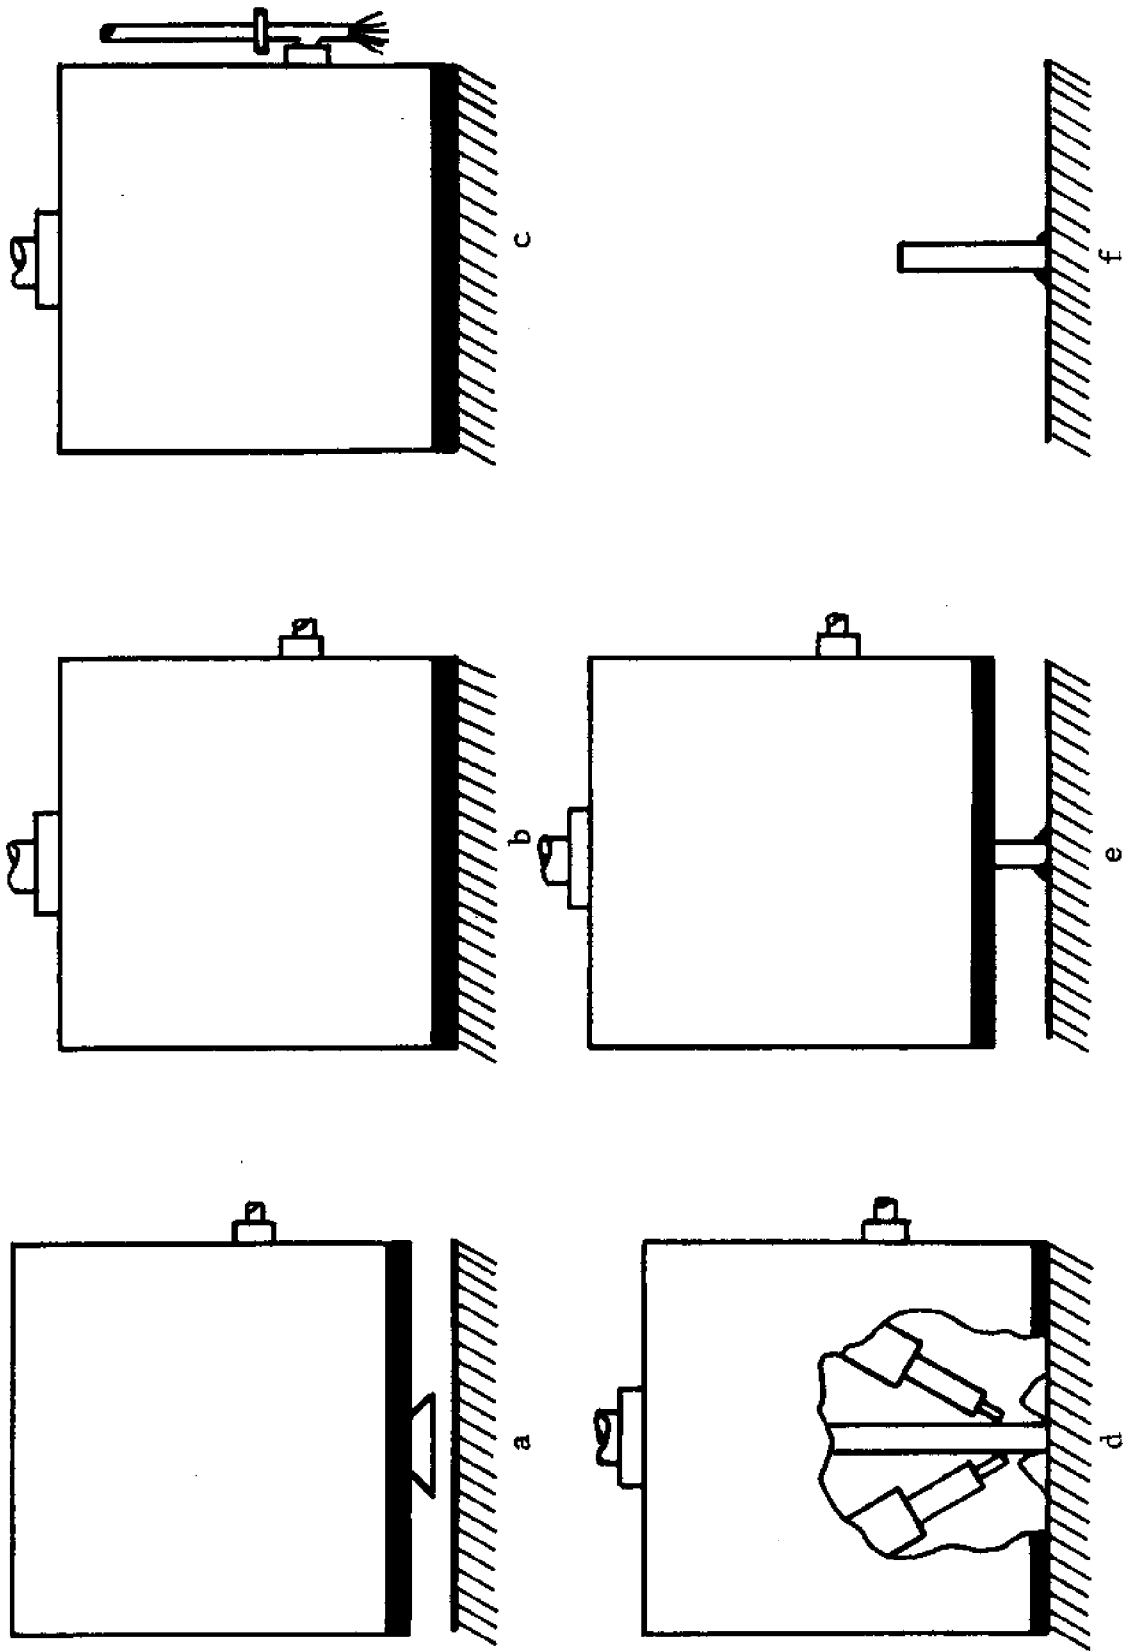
Welding procedure sequence of automatic welding machine [P19]
